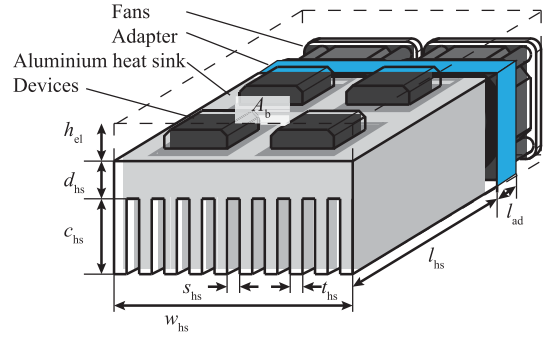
Heat sink geometry of the forced convection heat sink considered in this paper.
